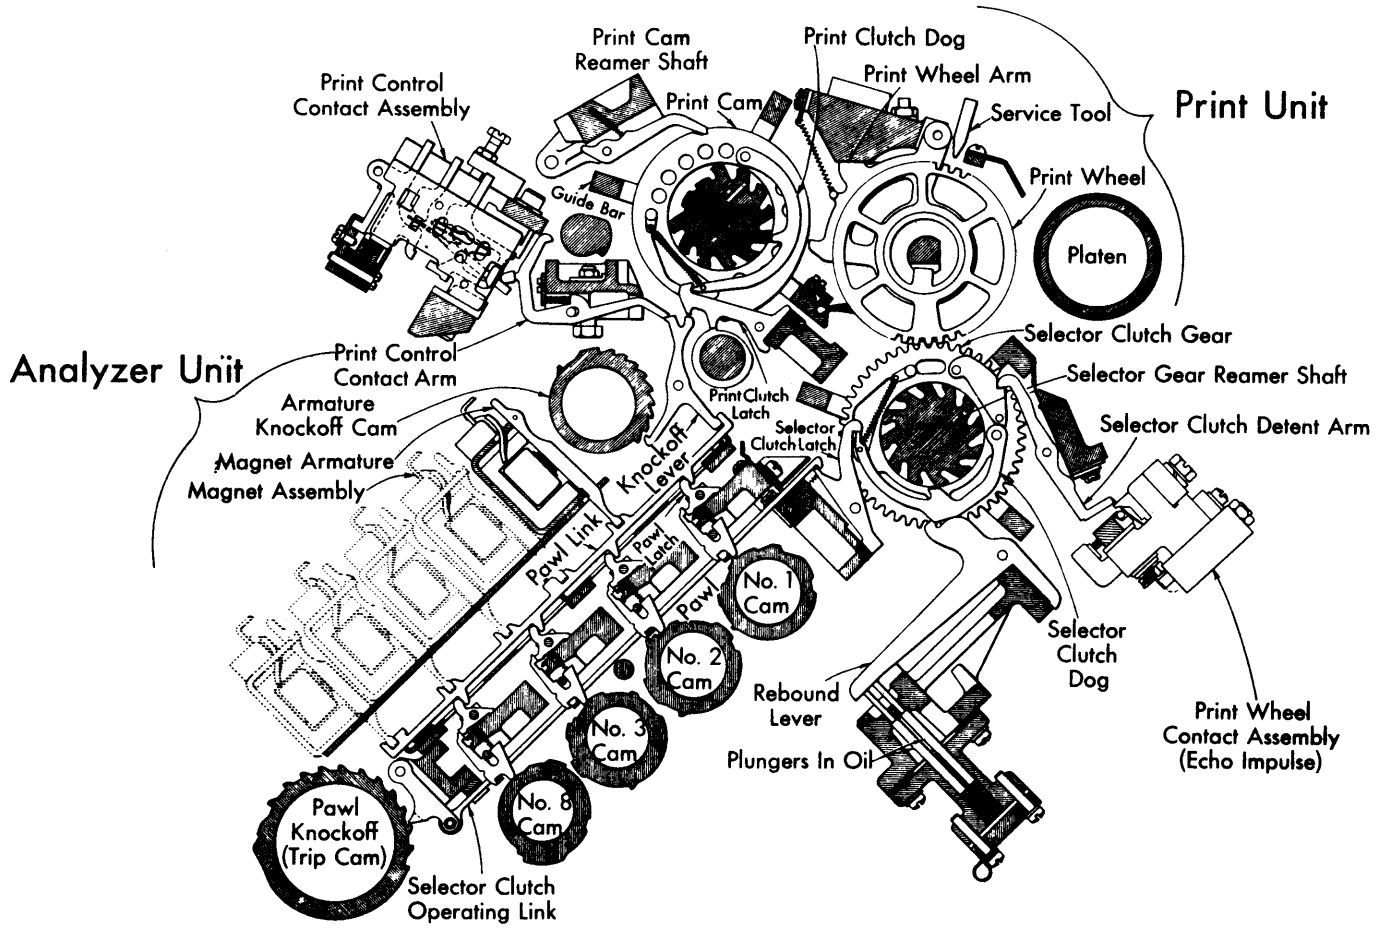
Printing Mechanism of the IBM 407 Accounting Machine
